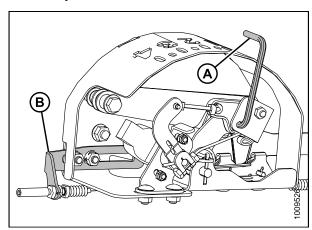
10 Volt Auto Header Height Sensor Assembly
